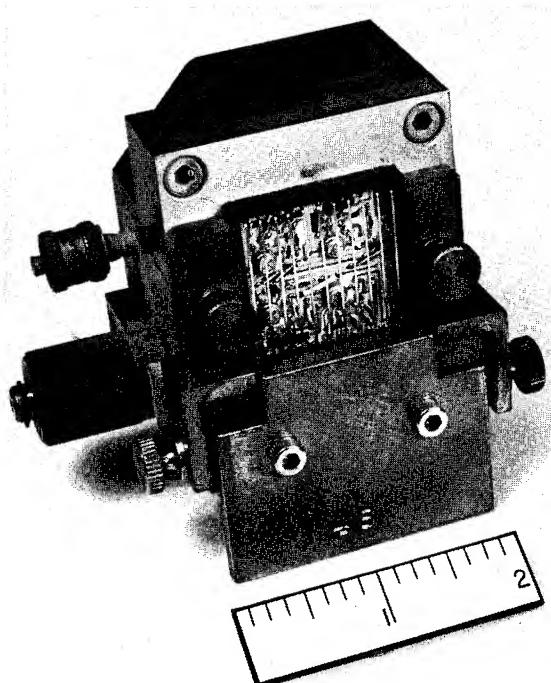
Welded wafer with potting ring ready for sealing and potting.
